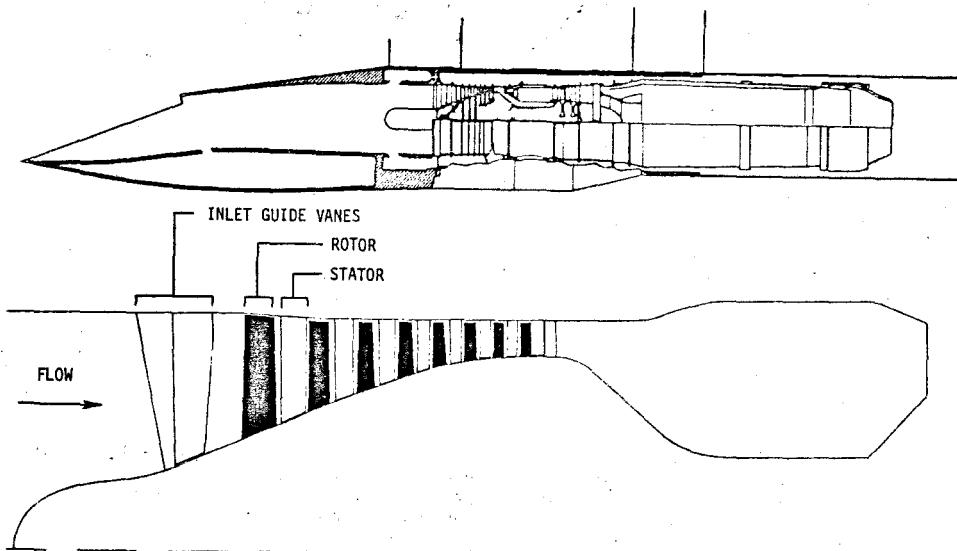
Meridional plane sections of turbojet engine and compressor (Ref. 17.1,17.2).
